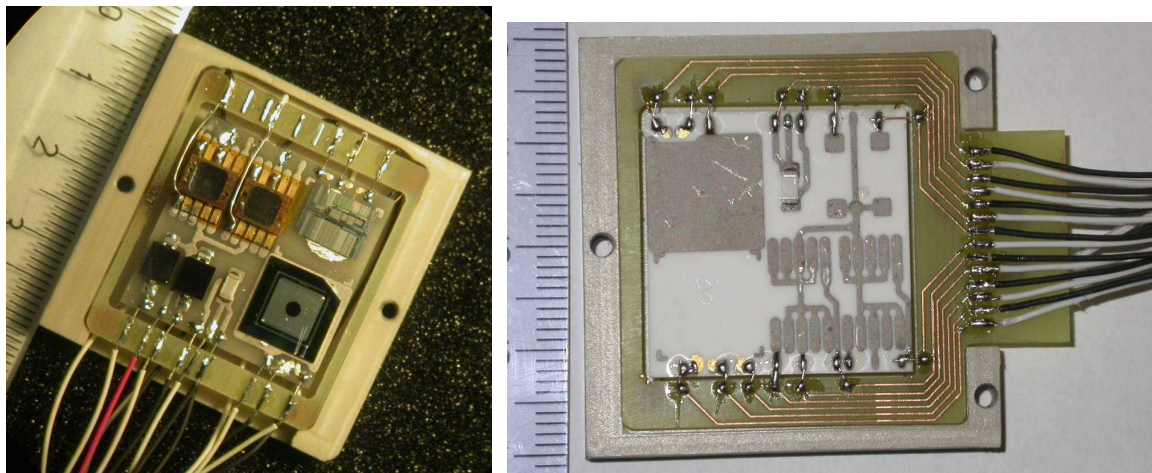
Left: populated hybrid connected to a PCB frame in the bottom part of PEEK housing. Right: Al203 hybrid in new PCB frame and PEEK box.
